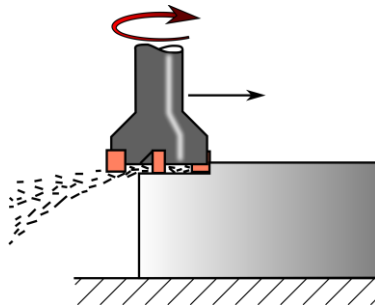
How a Cutting Head Works for CNC Milling [1a]
